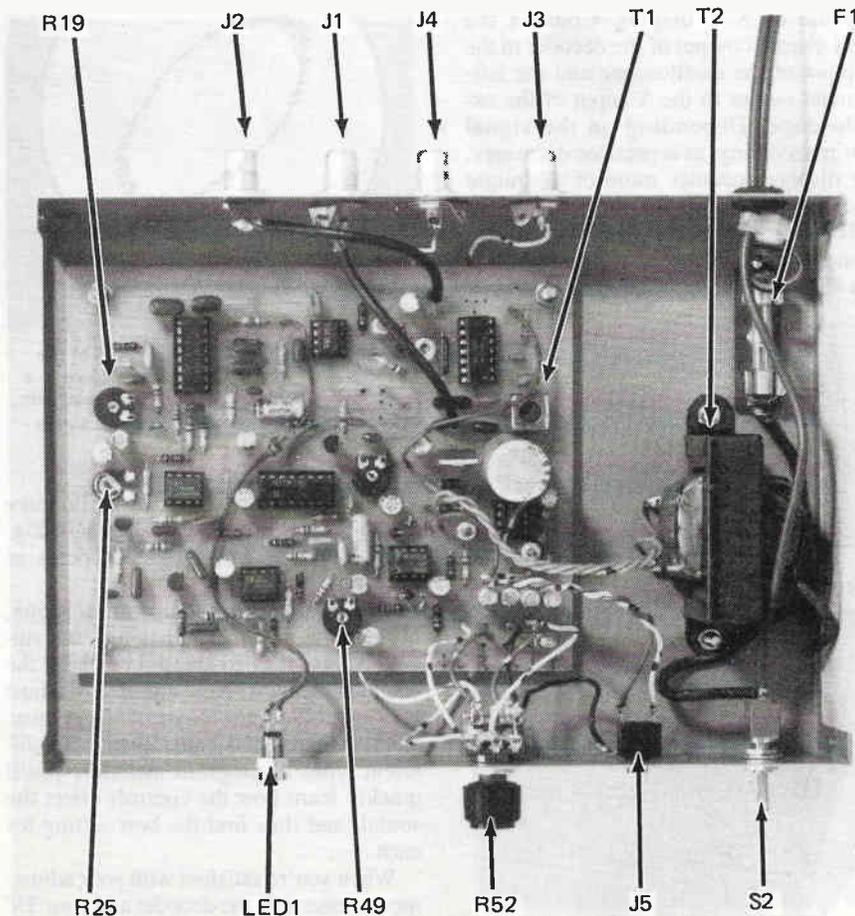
THE COMPLETED DECODER appears as shown here. The board shown was an early prototype, so it doesn't match the parts-placement diagrams (shown in Fig. 7 and Fig. 8) exactly.
